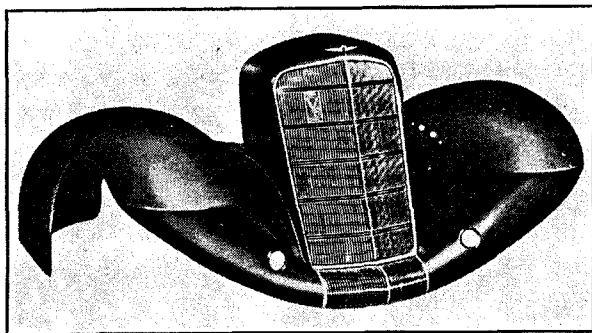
The front fenders and radiator casing may be removed as a unit as illustrated, or these parts may be removed individually
